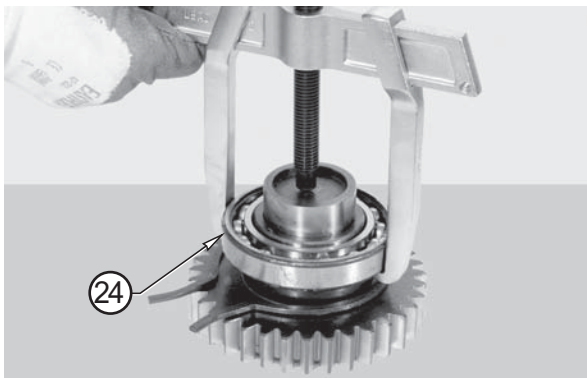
With a puller, remove the bearing (24) from the input shaft (18).
